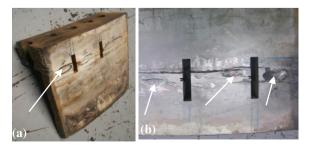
(a) Flange and (b) hot rolled steel plate, with two holes from where the samples were cut.
